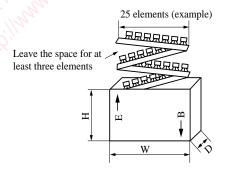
Box Dimensions for TO-92 Type Packages with Ammunition pack
